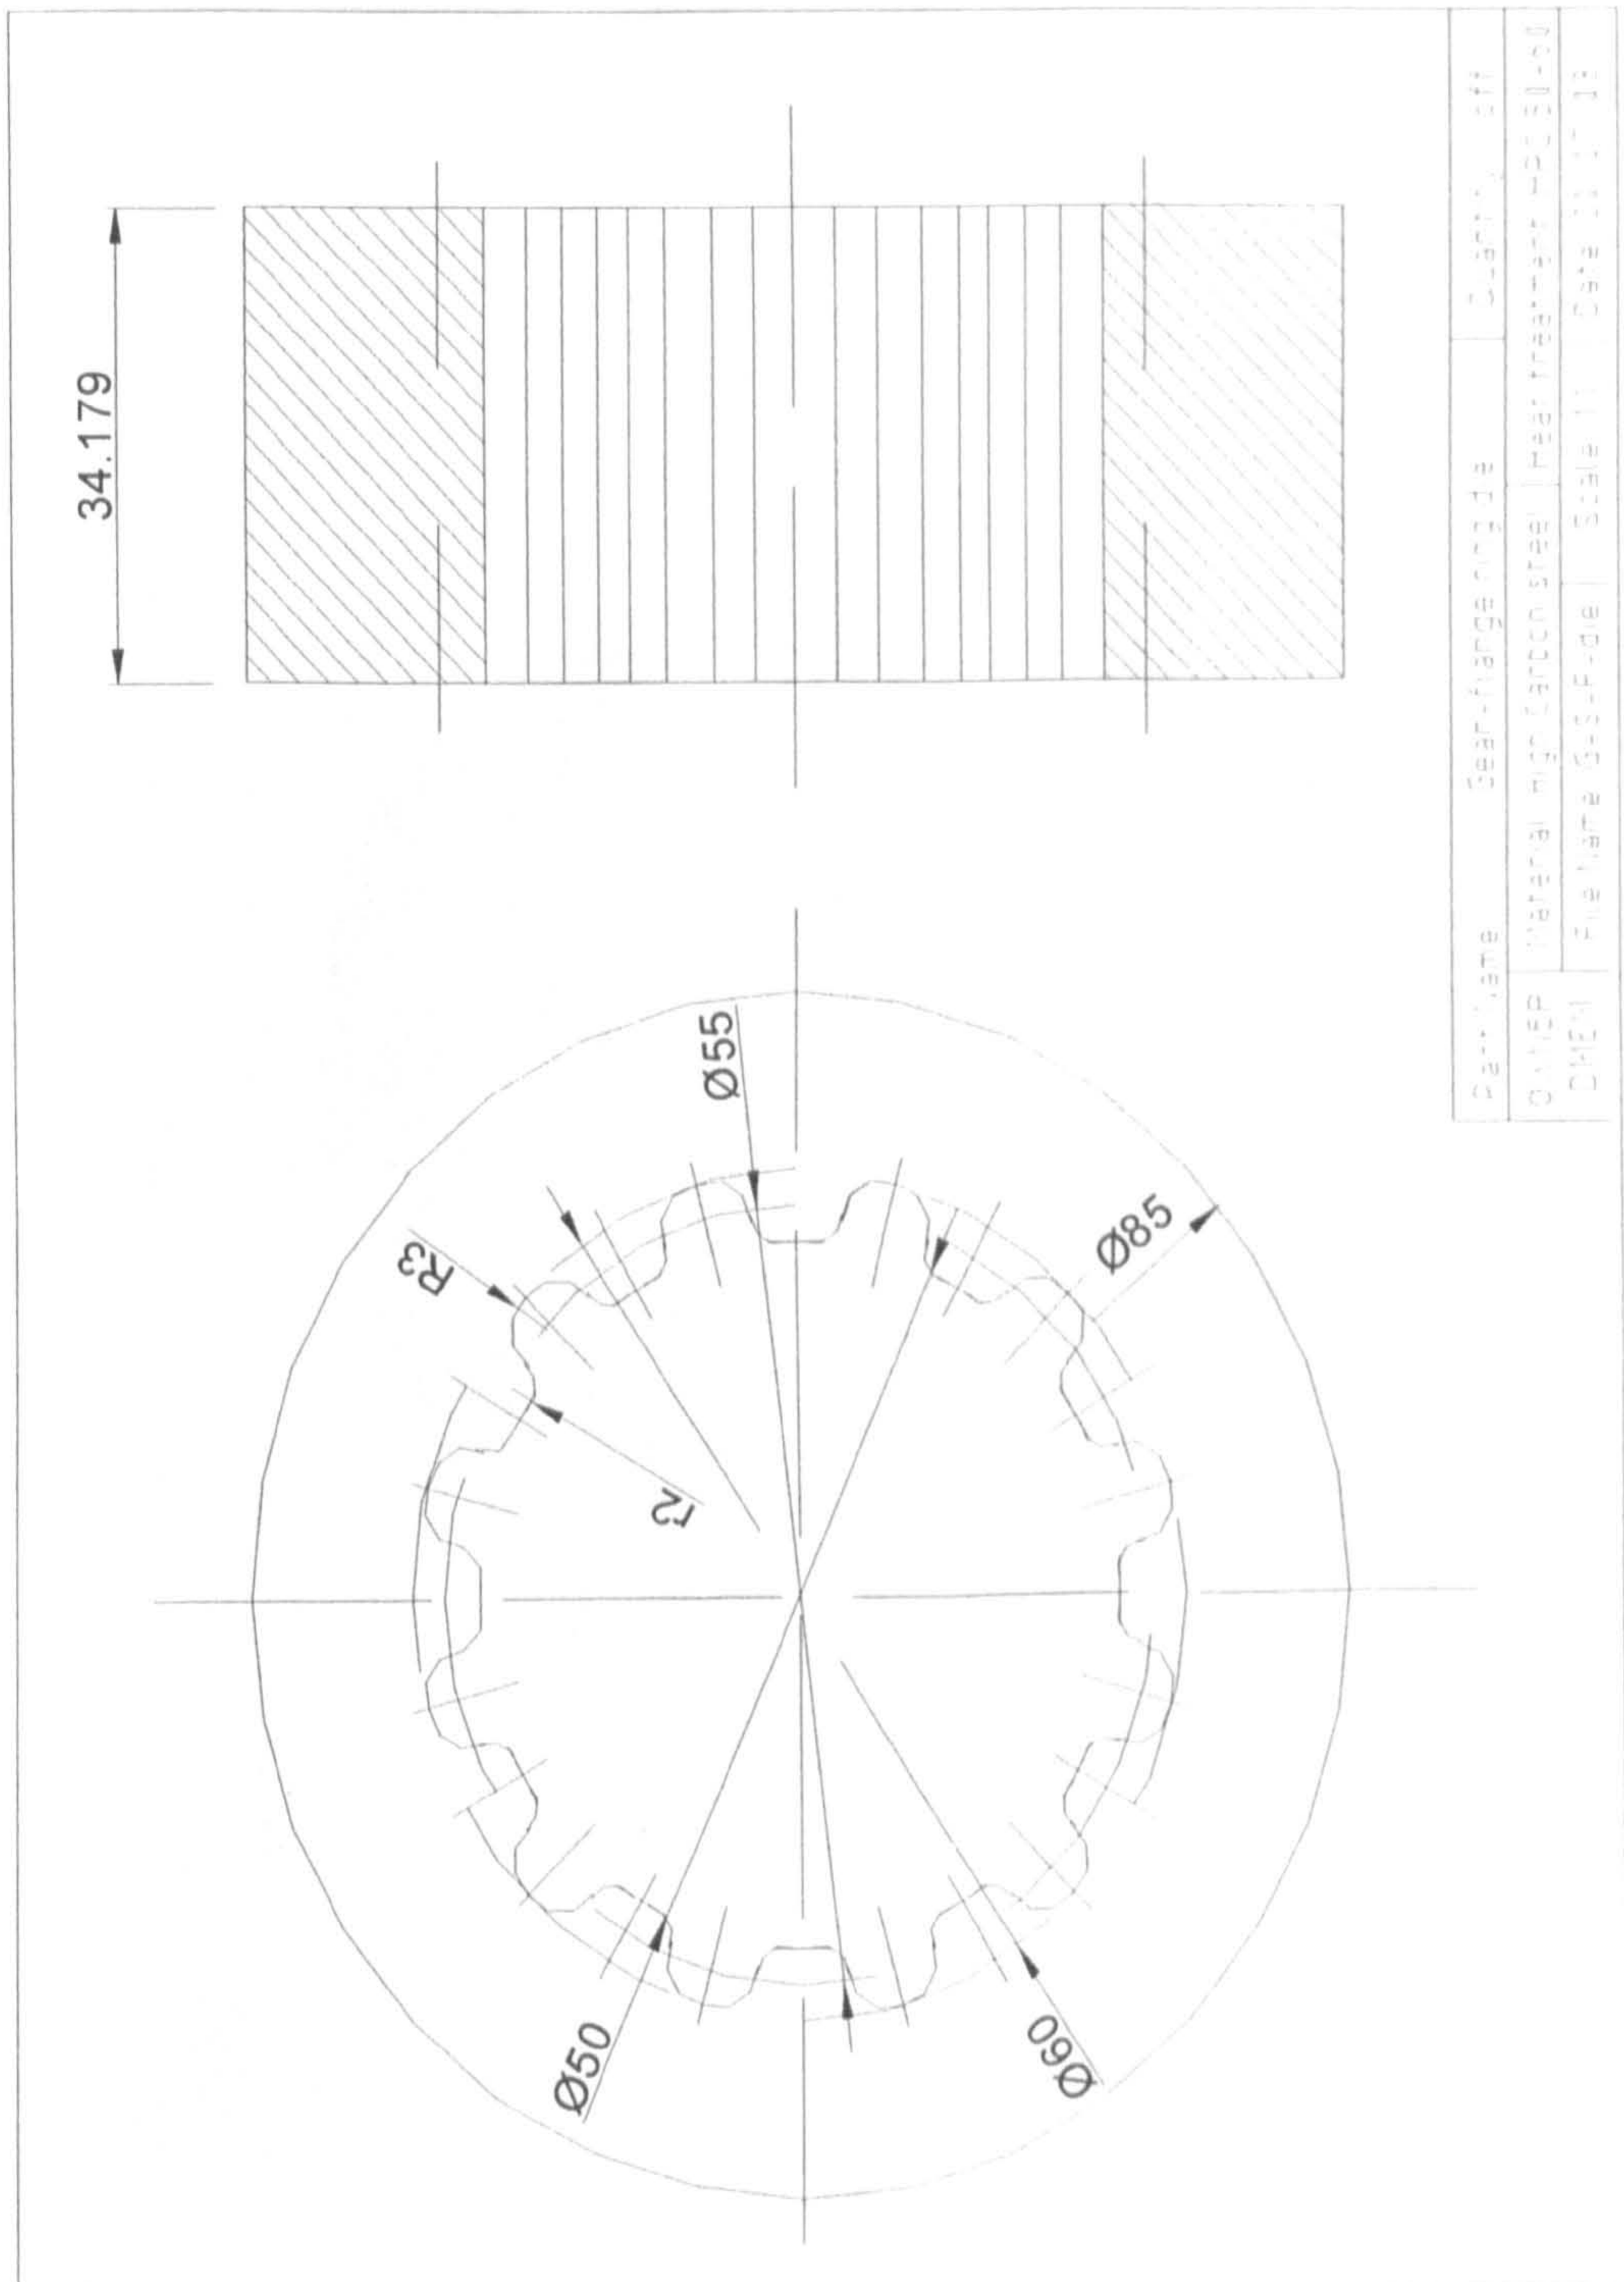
The forming die designed for the forming of the gear-shaft
